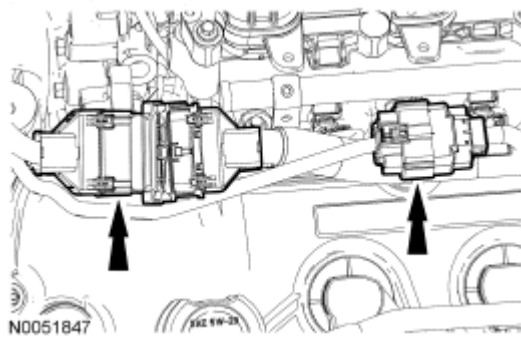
Identifying Engine Wiring Harness Electrical Connectors
